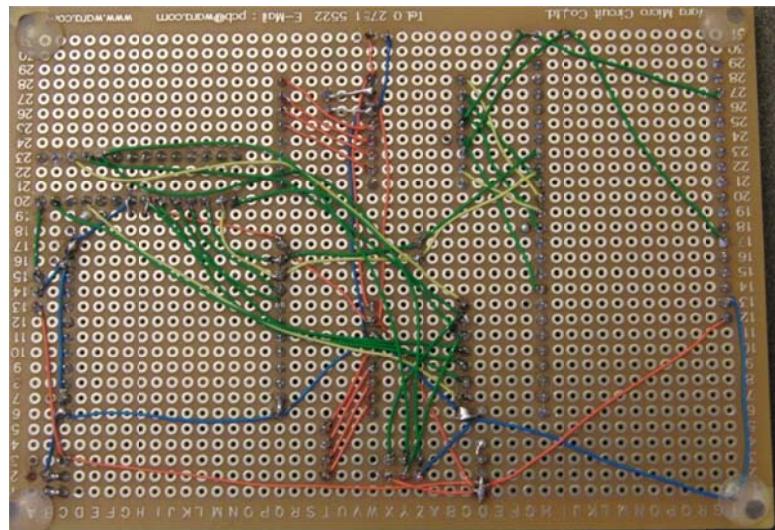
Bottom Side of the Solder Board on the Remote Tank
